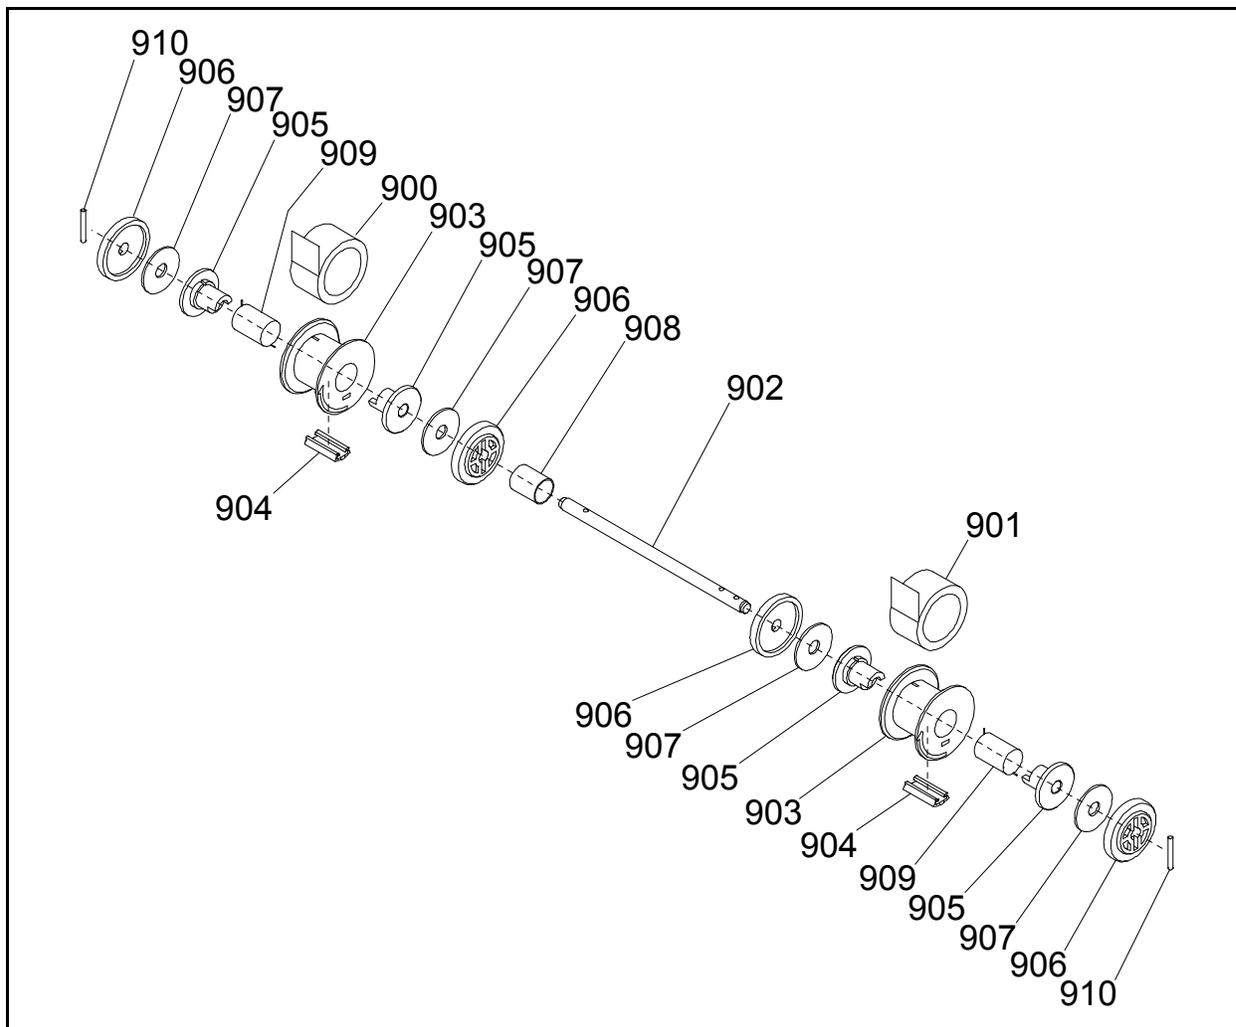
VEGA-RC Twin Shaft Assembly Exploded View
